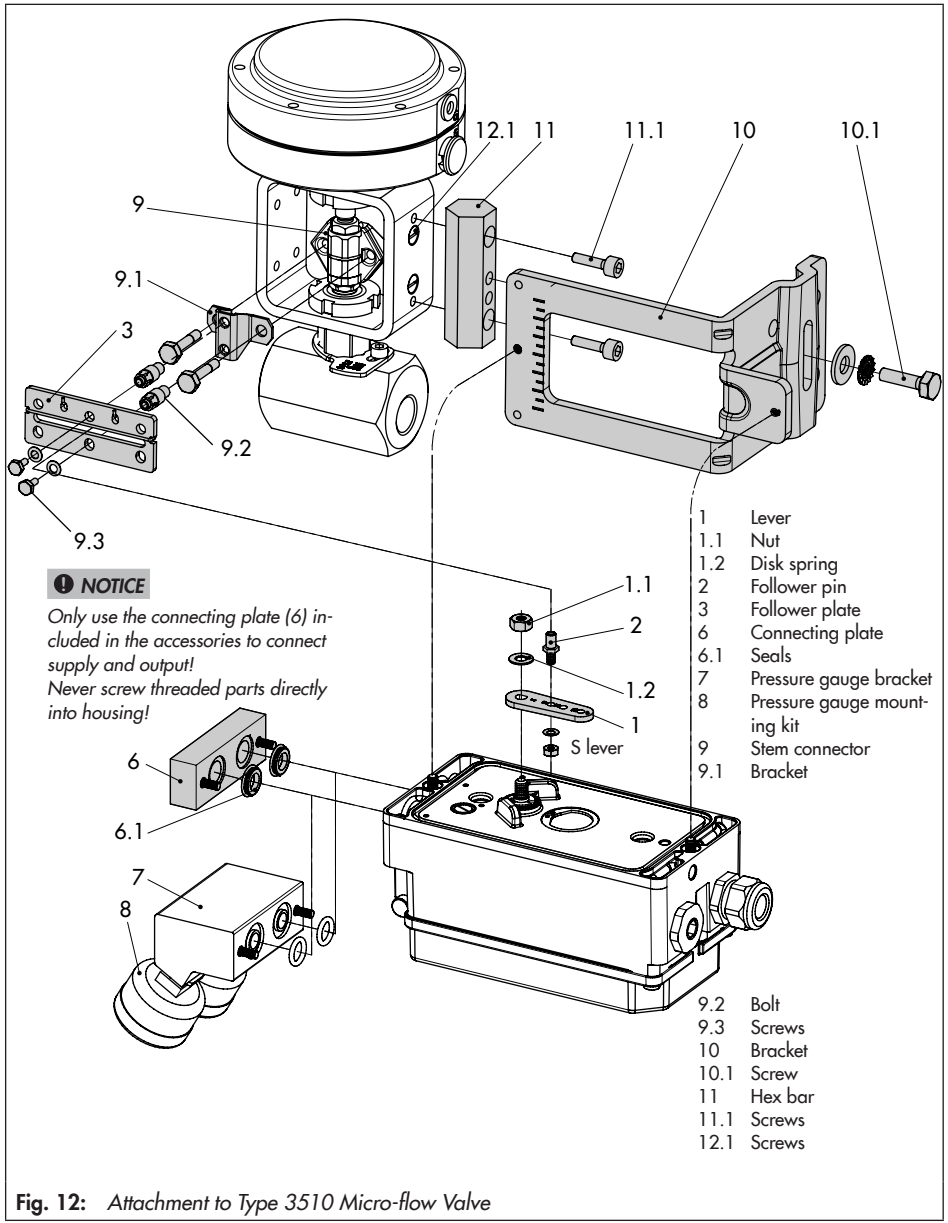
Attachment to Type 3510 Micro-flow Valve
